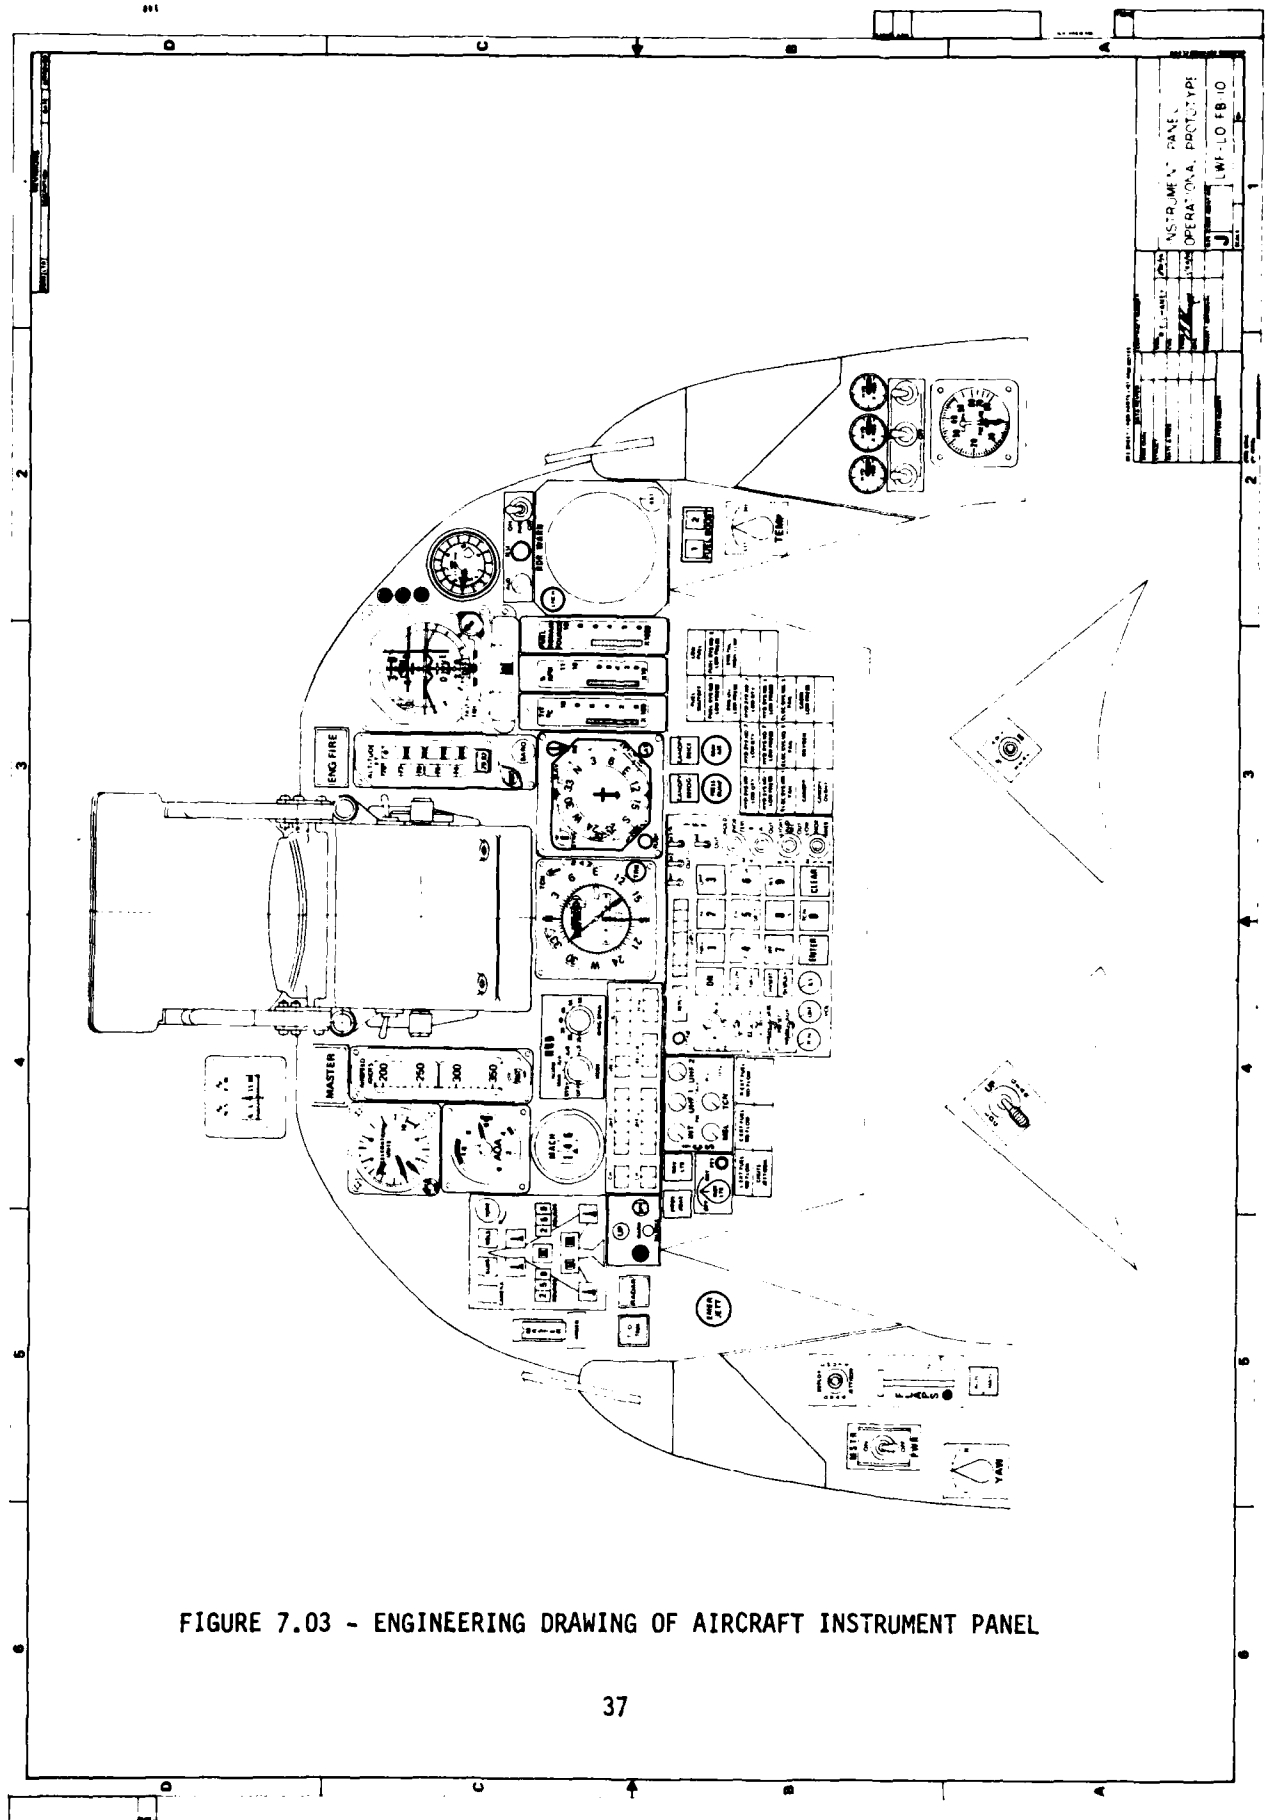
ENGINEERING DRAWING OF AIRCRAFT INSTRUMENT PANEL
